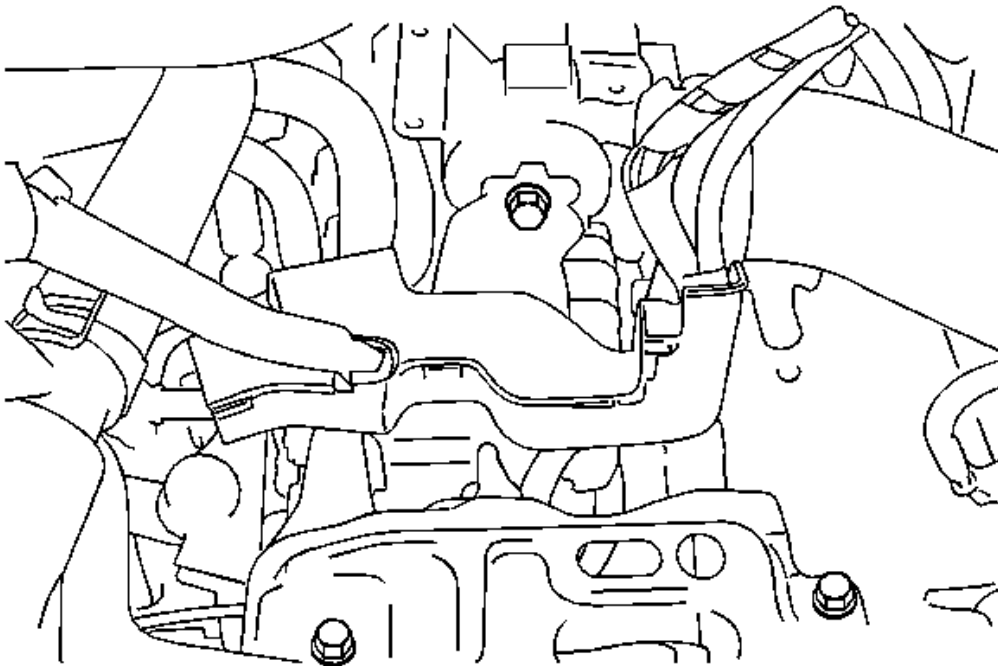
Identifying Wire Harness Clamps At Battery Carrier
